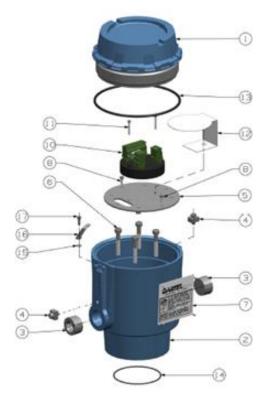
Exploded view diagram of the LME components | Diagramme de vue éclatée des composants du LME
